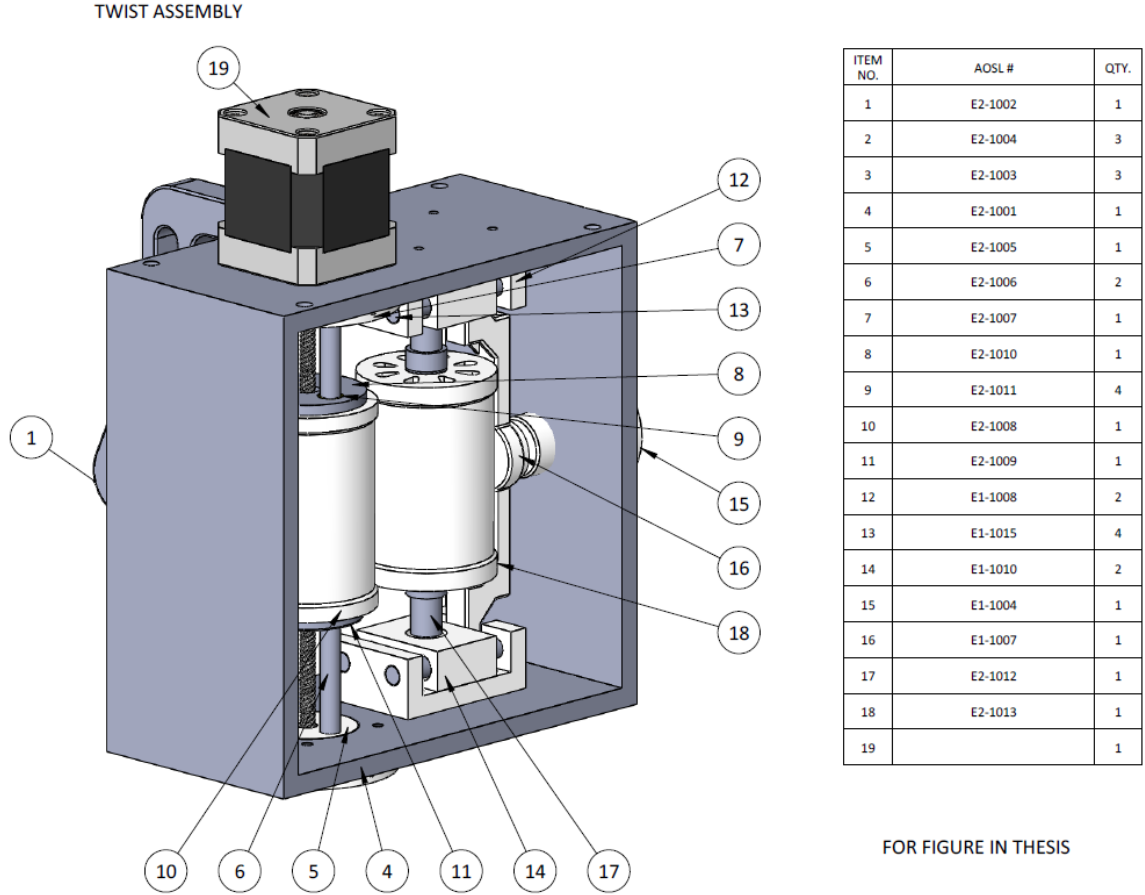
Prototype I Twist Assembly E2 Illustration
